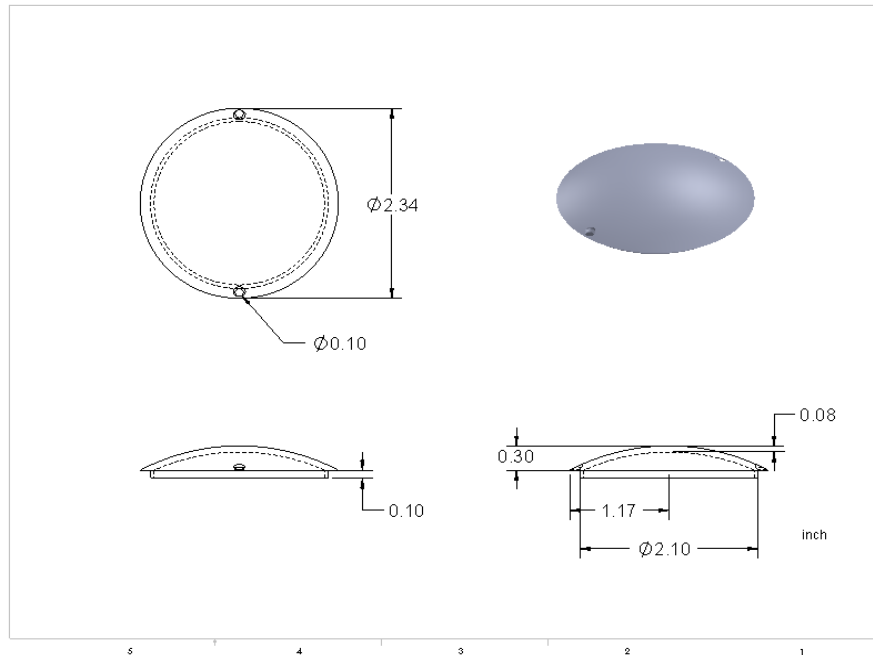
SolidWorks Drawing of 3D printed removable Hubcap
